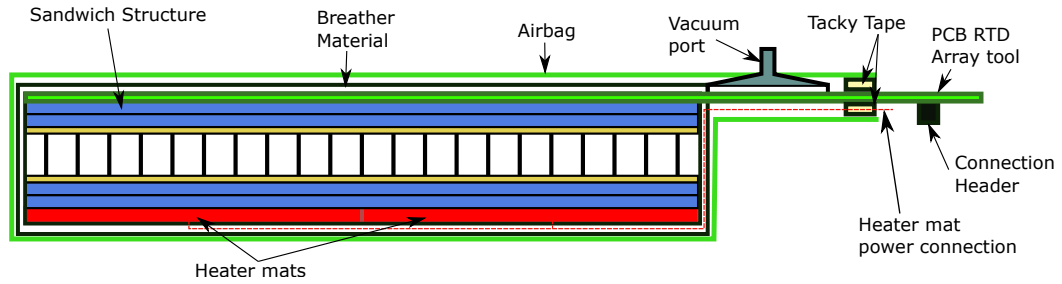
Cross section of the through transmission set-up for sandwich structure using heater mats and the PCB RTD array.
